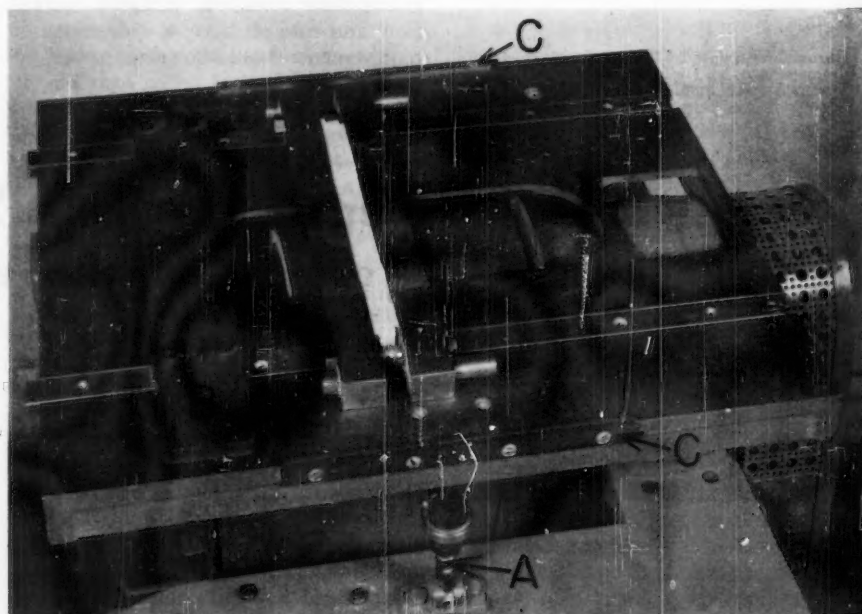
Top of Sander Showing: (A), Adjusting Screw for Table Height, (B), Specimen Jig Guide, and (C), Stops to Determine Jig Travel.
